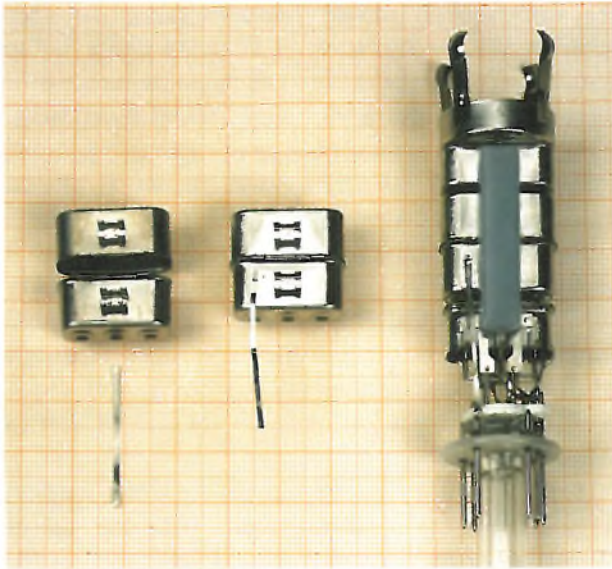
A product made with the laser spot-welder. Left: two grids ('grids 3a and 3b') and a contact strip for a gun for a colour television picture tube. Centre: the two grids and the contact strip welded together by 5 spot-welds. Right: the complete gun, which contains about 80 spot-welds.
